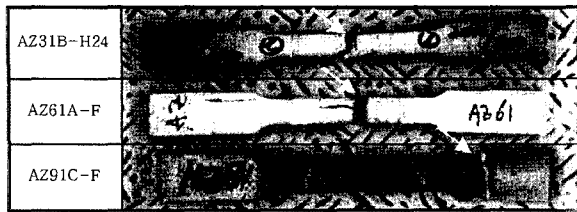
Fracture location after tensile test of FSW weldments of Mg alloys
